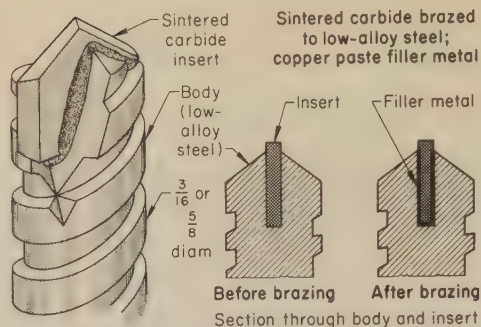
Masonry drill with carbide tip that was furnace brazed to drill body to meet high production requirements
